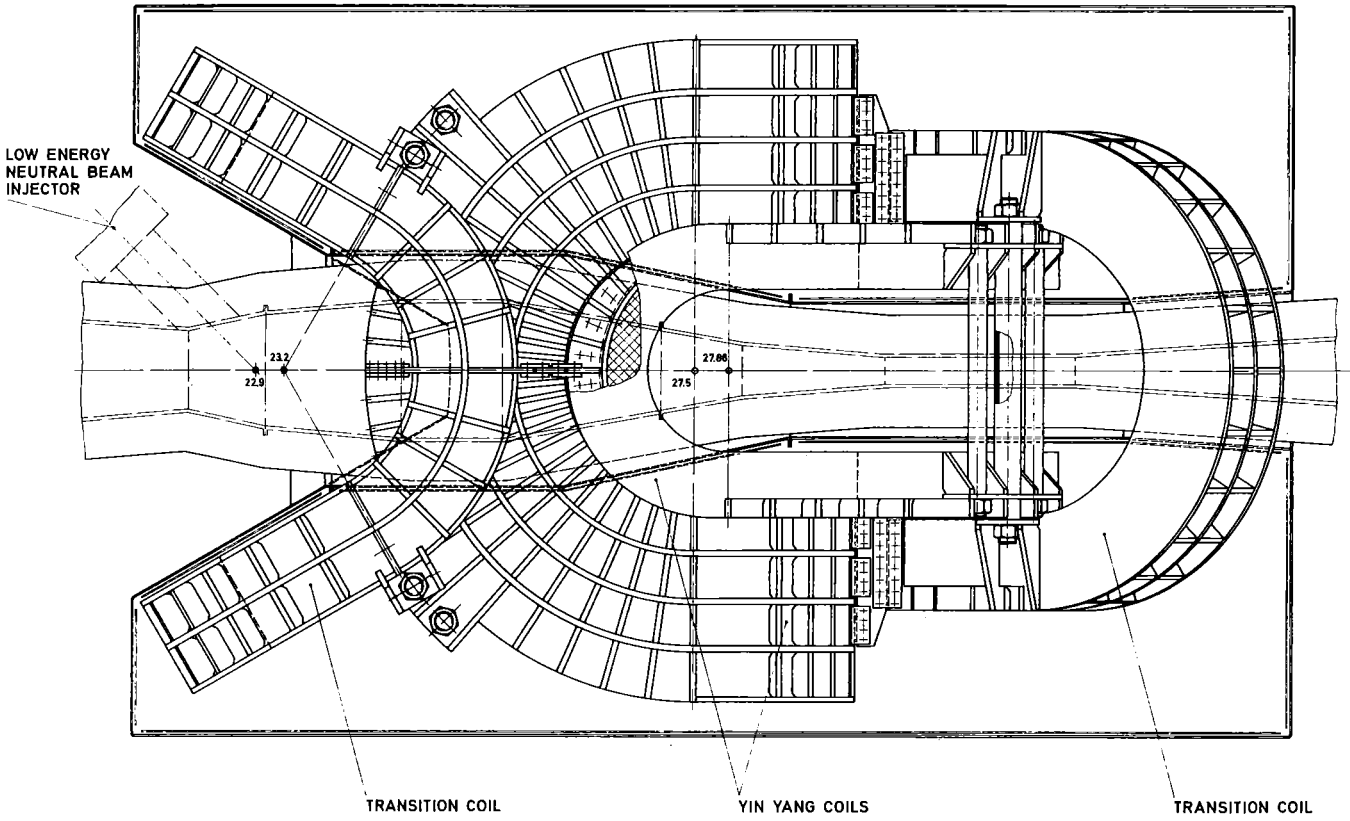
END PLUG COILS - ARRANGEMENT
